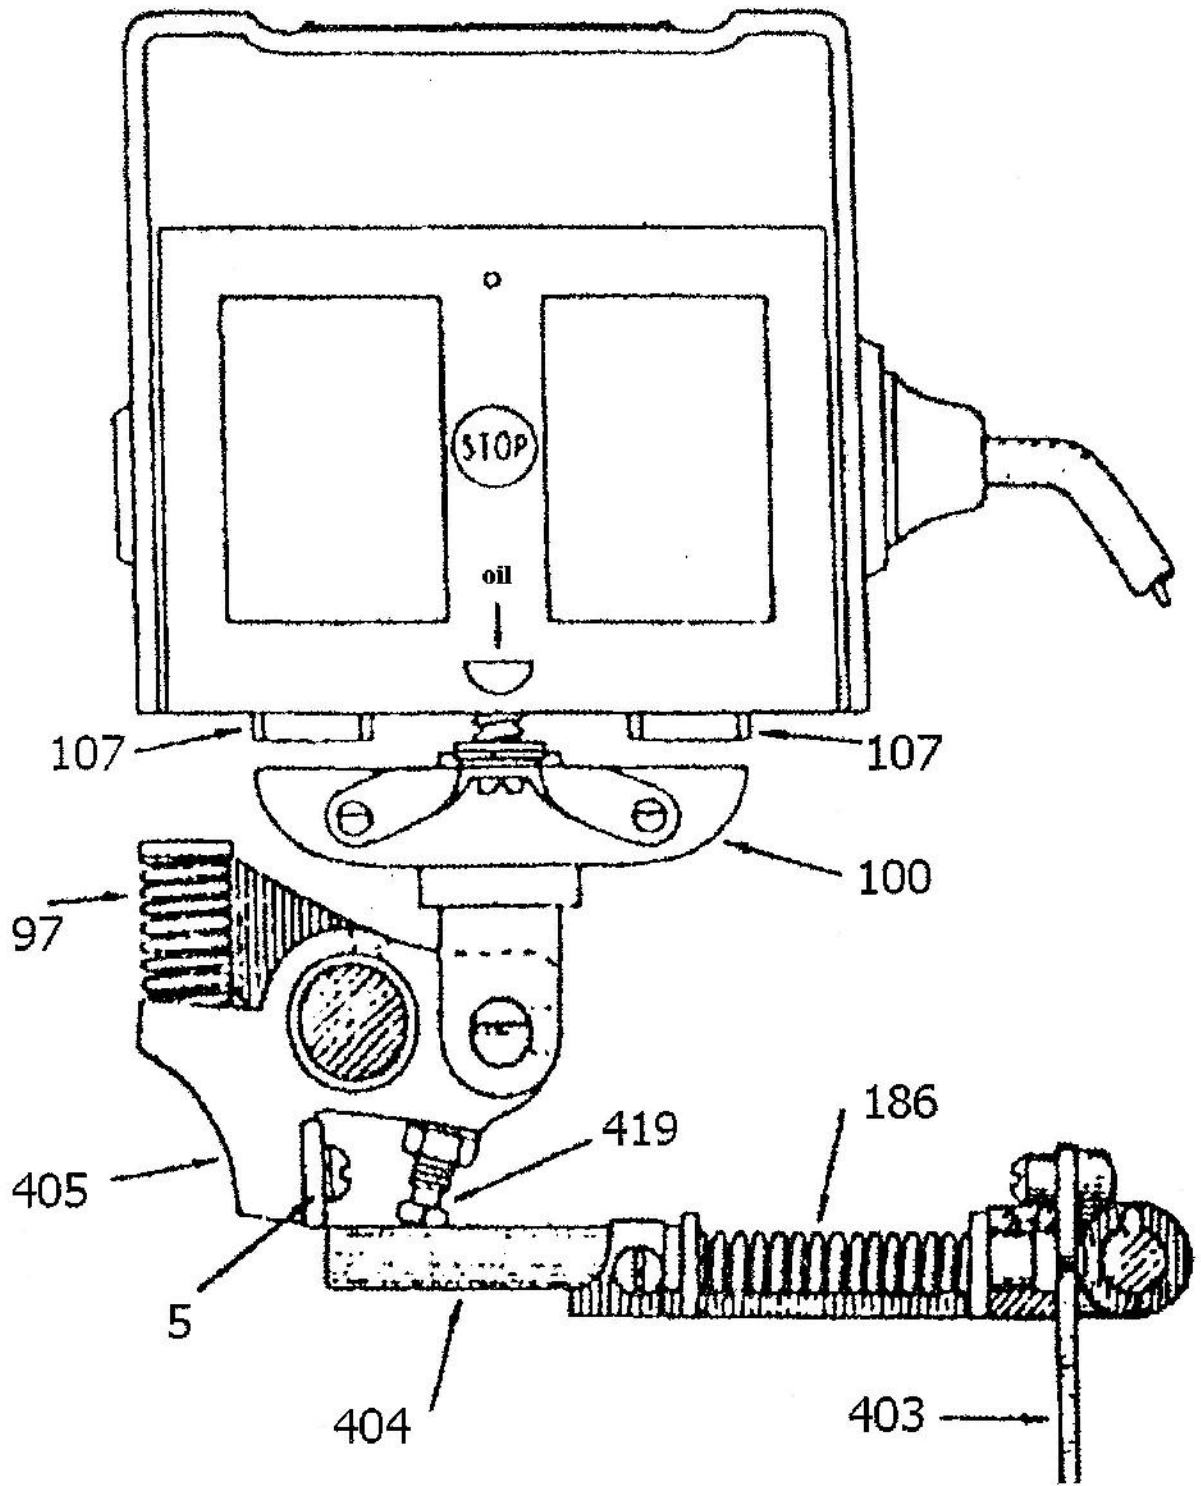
Drive; Rocker Arm Ready to Latch On
